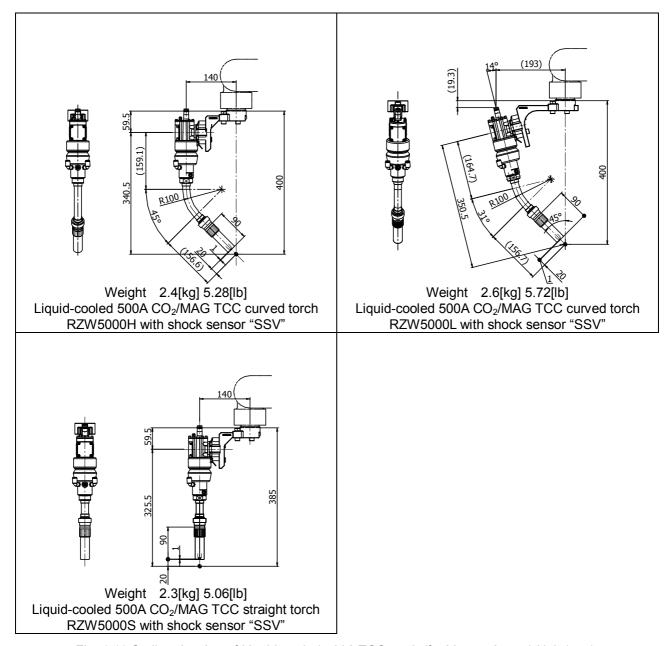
Outline drawing of Liquid-cooled 500A TCC torch (for V type, A type) Unit (mm)
